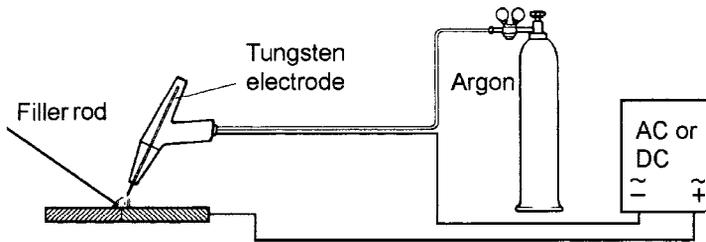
Schematic diagram of TIG welding equipment.
